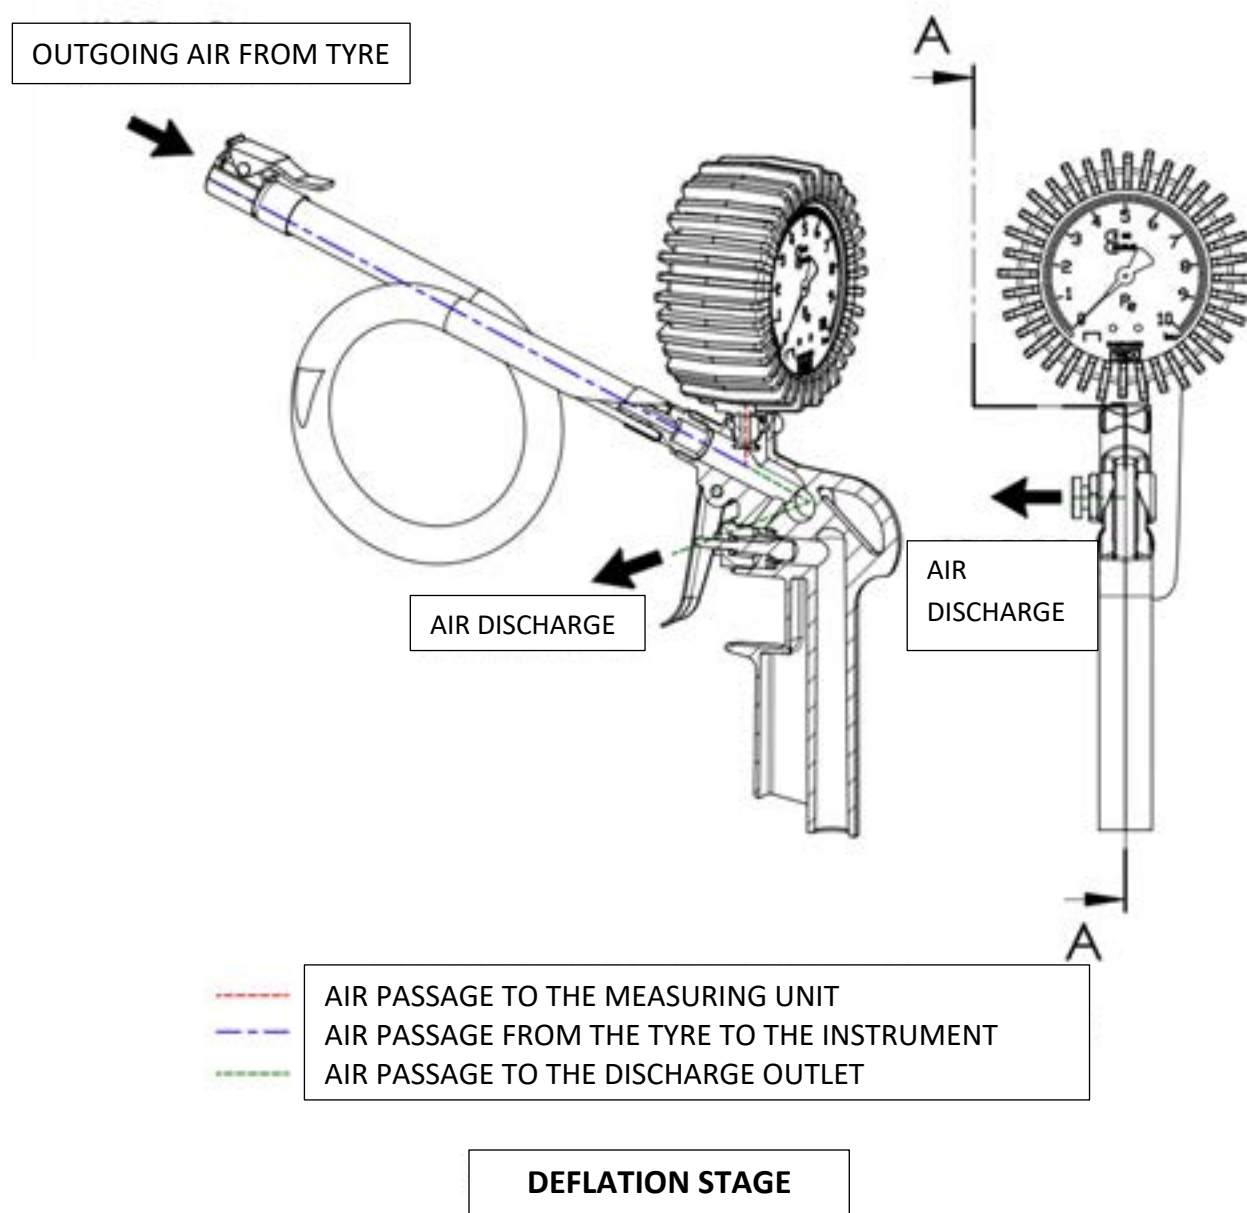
TYRE PRESSURE GAUGE “60 D/T” (vers. 63 mm)
